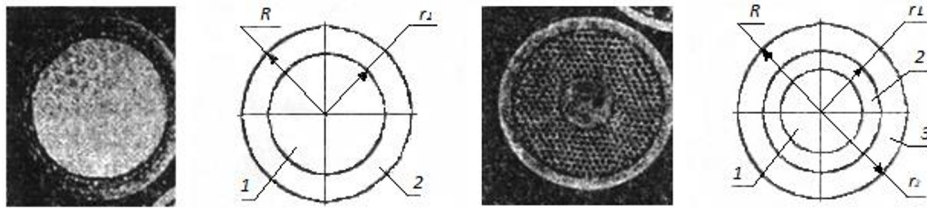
Cross section of composite billet for wire drawing: 1 - core; 2, 3- shell.
